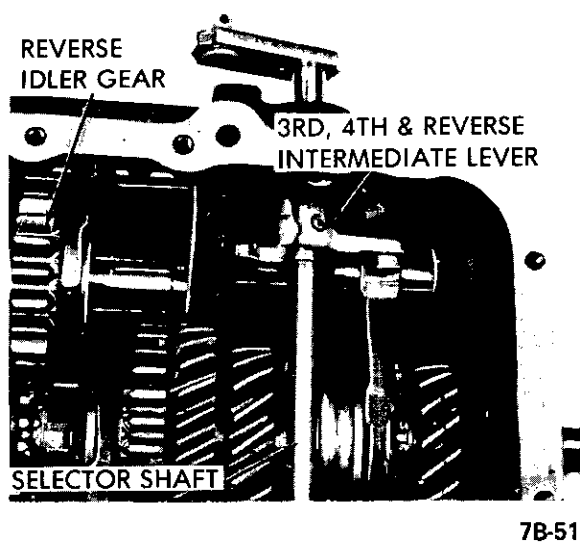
B-51 Position of Third, Fourth, and Reverse Intermediate Lever on Selector Shaft
